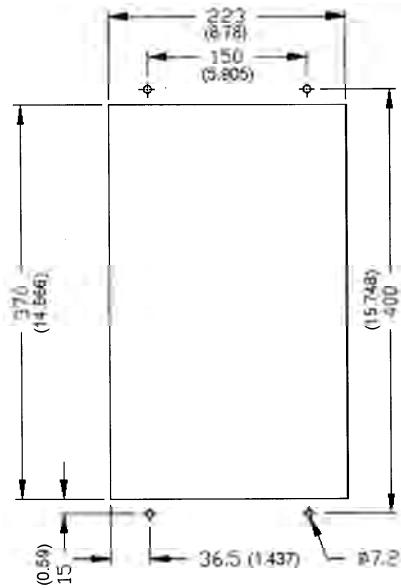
Cutout dimensions in air duct - Dimensions mm (inch)
